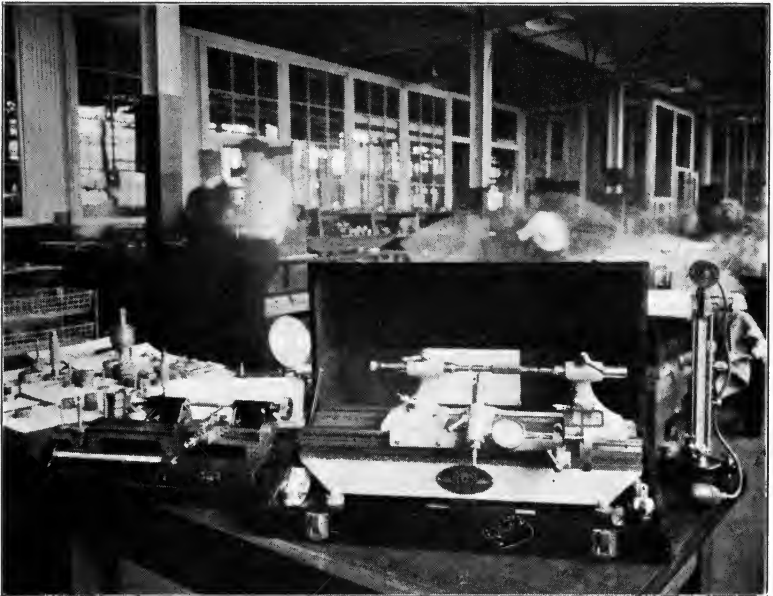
Some of the Special Equipment of the Tool- and Gage-Checking Room—Lincoln Motor Company
